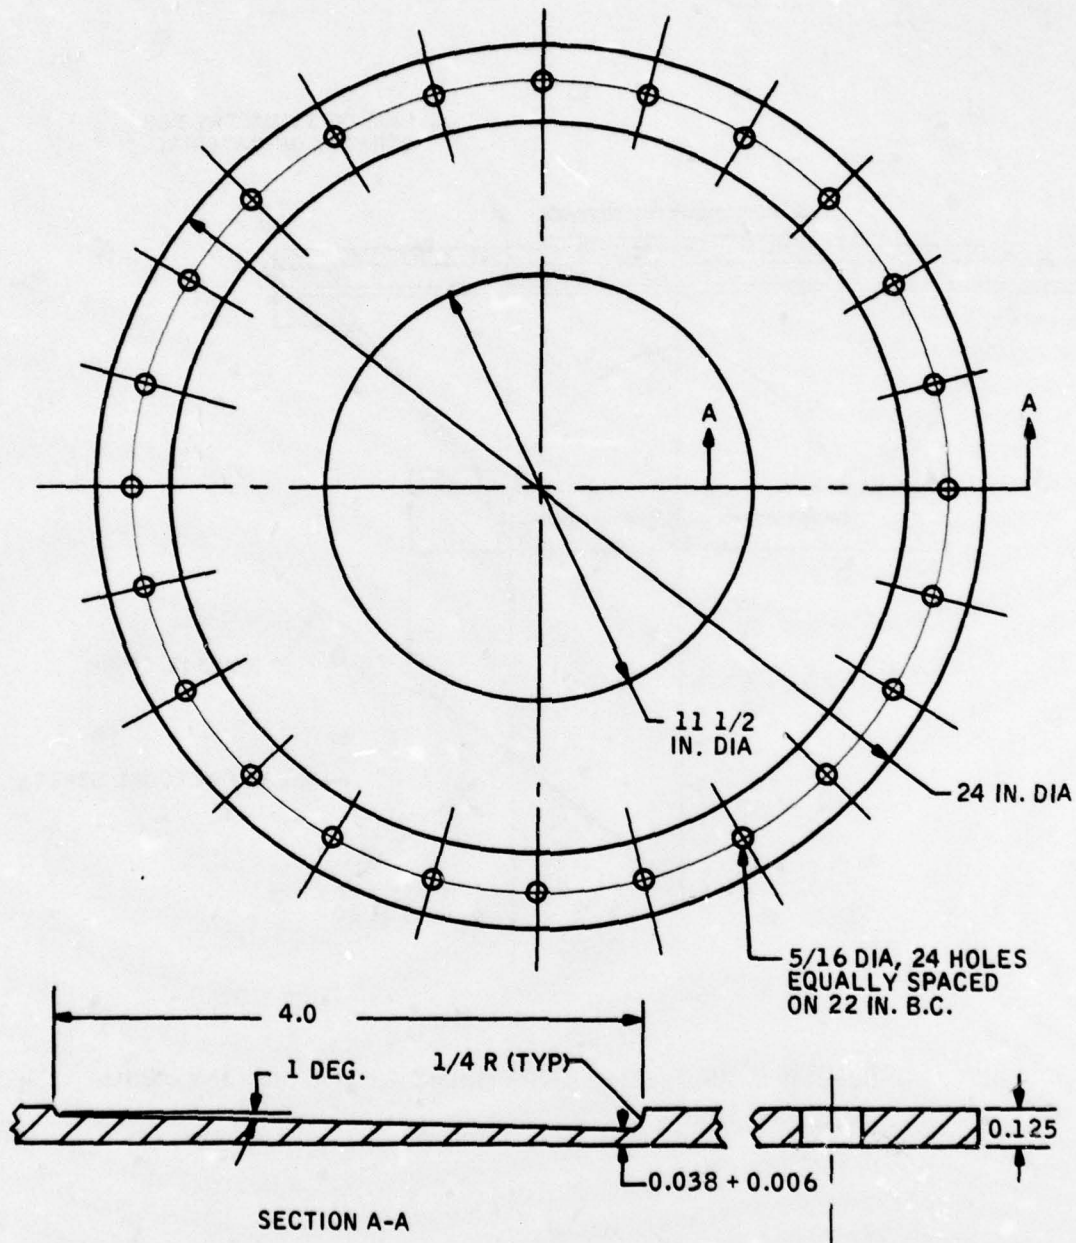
Plastic Sheet - Machining for 7A Visor Fab
